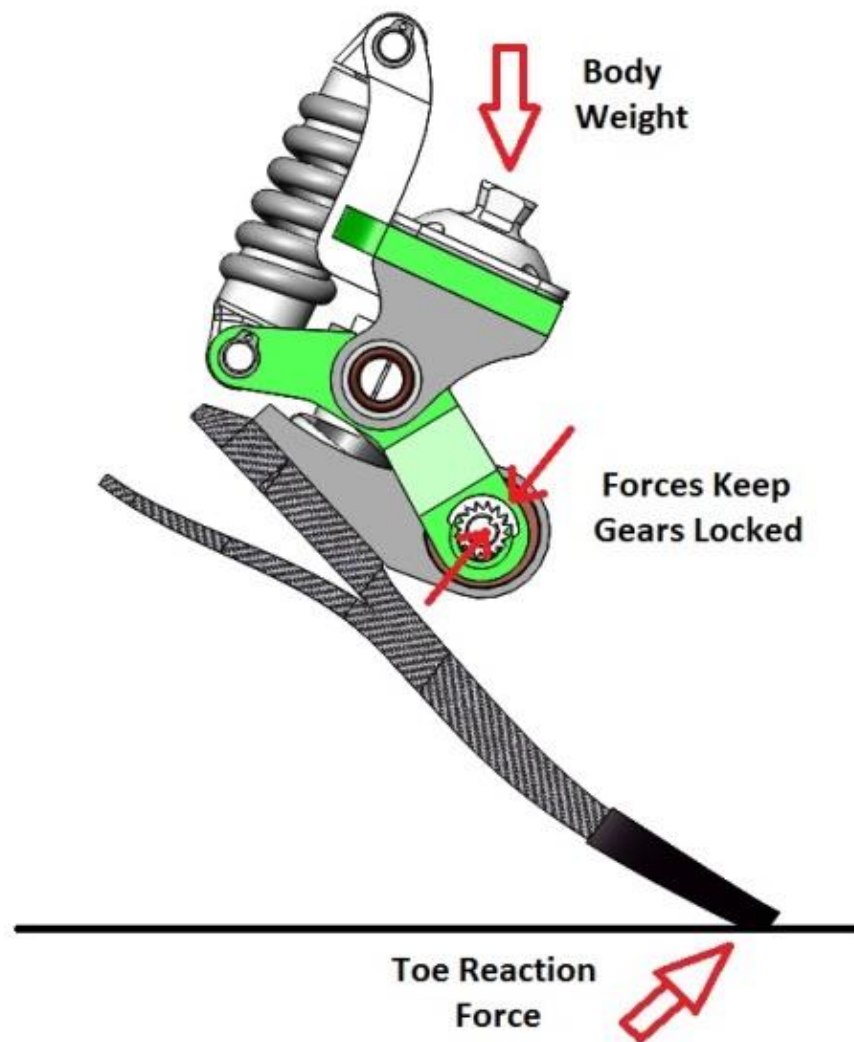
SPRING FORCES ON FLOATING SHAFT GEAR TEETH.
